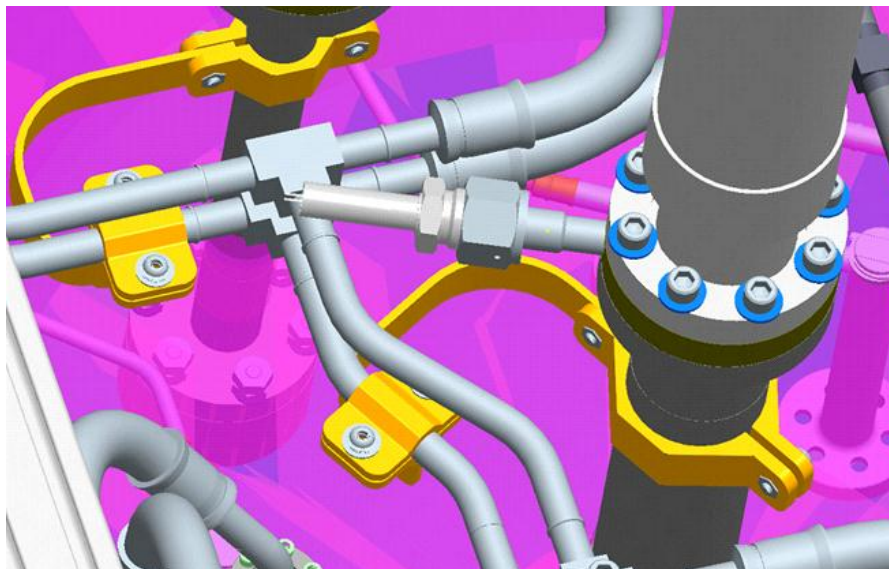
Connections from BAC Shield plumbing to stainless steel vent plumbing
